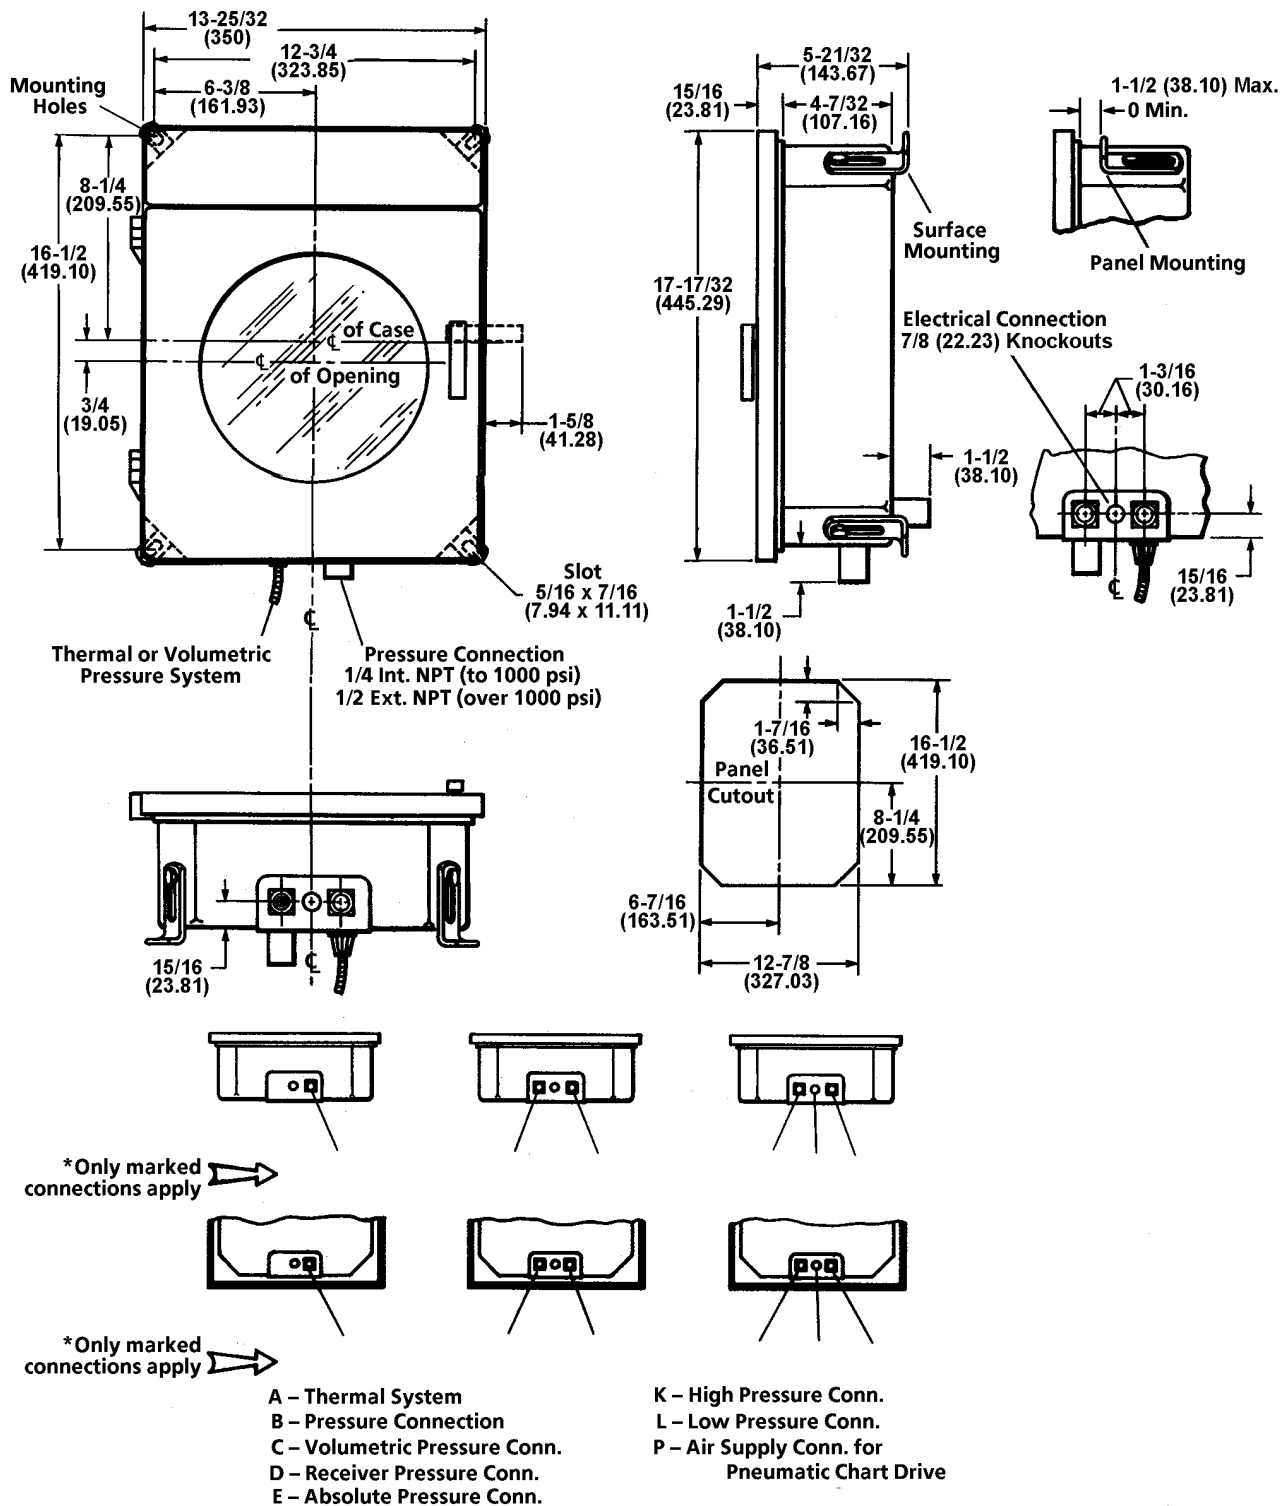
Recorder Panel and Wall Mounting Dimensions (Connections at Back or Bottom)
